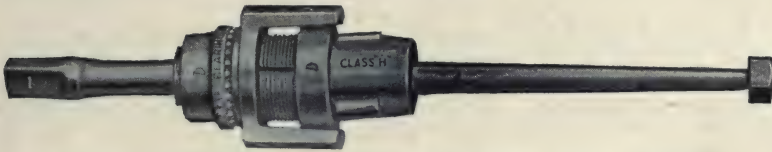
Henderer-Ferguson Self-Feed Roller Tube Expander.
